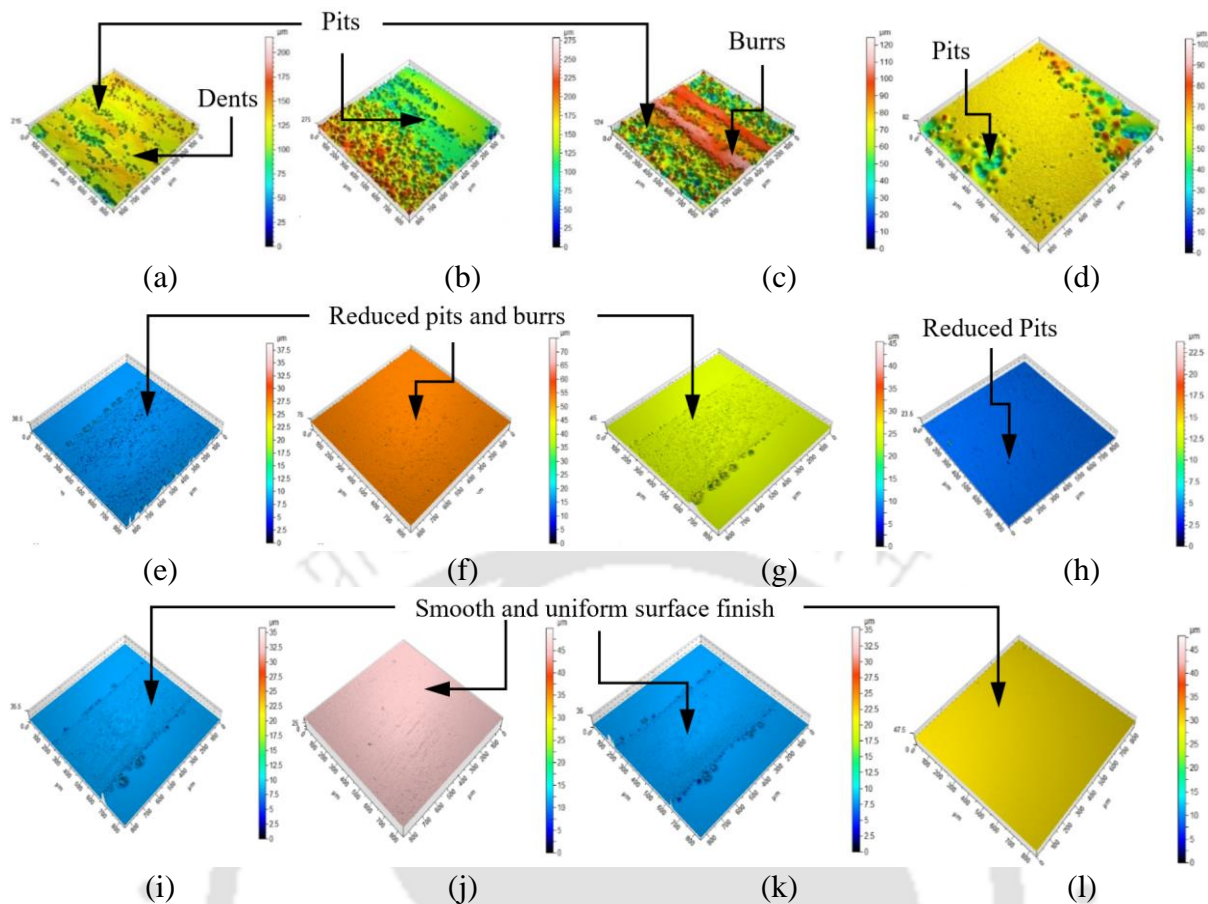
Surface topography of tooth (a) in-between, (b) involute, (c) top and (d) face profiles of miniature gear before finishing, tooth (e) in-between, (f) involute, (g) top, and (h) face profiles of miniature gear after finishing without using uniform flow restrictor, and tooth (i) in-between, (j) involute, (k) top and (l) face profiles of miniature gear after finishing with uniform flow restrictor
